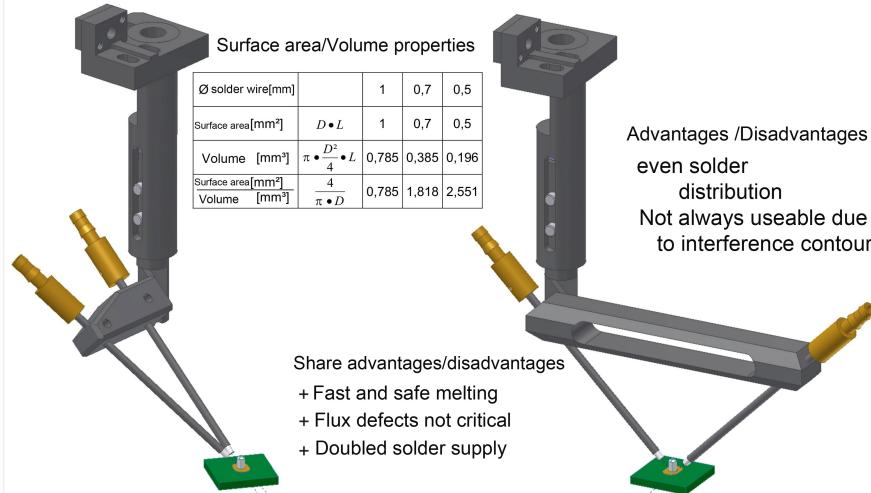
Instead of one solder wire with a diameter of, usually, 0.7mm, two solder wires of 0.5mm diameter are fed in parallel.
